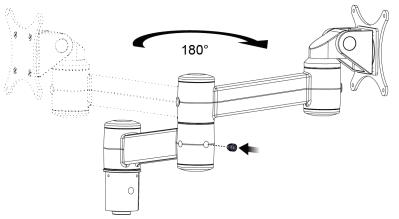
Second rotation of articulating arm assembly and inserting hex screw, shown from behind (series II UAWS)
